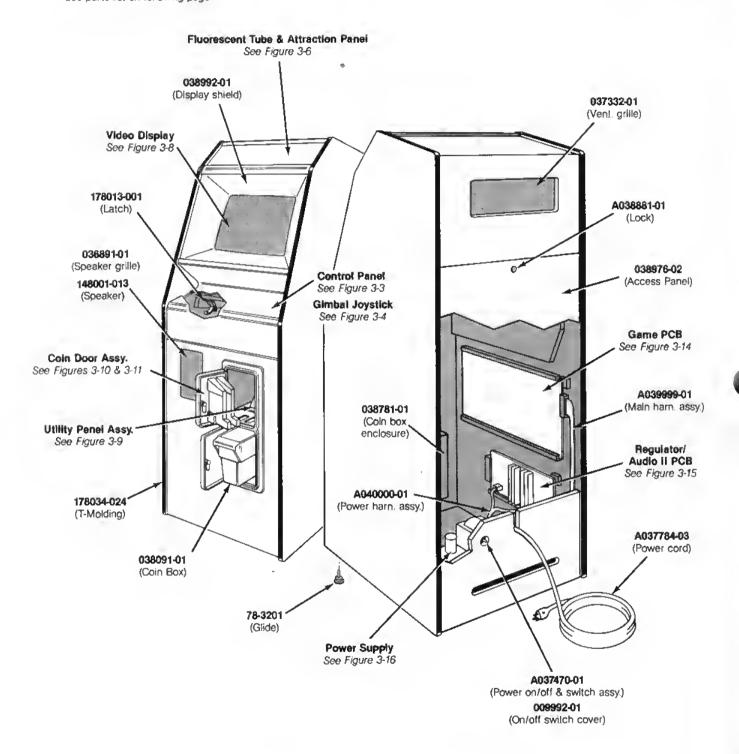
Cabinet-Mounted Assemblies Ireland-Built Game A040005-02 A
